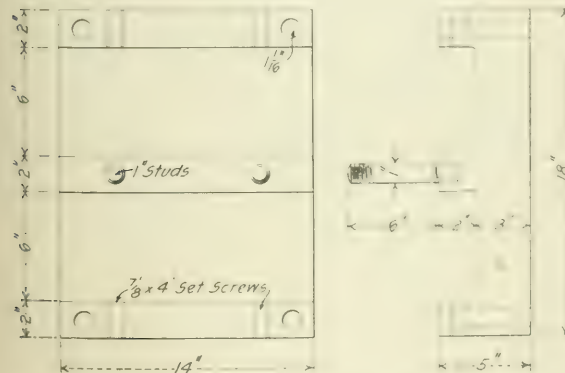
Chuck to Hold Engine Truck Pedestals on Slotter.
